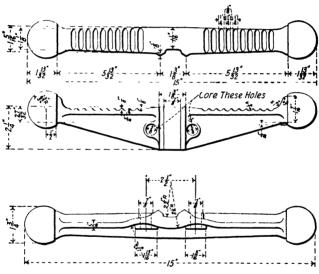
Detail of step used on ladder shown in Fig. 48.
